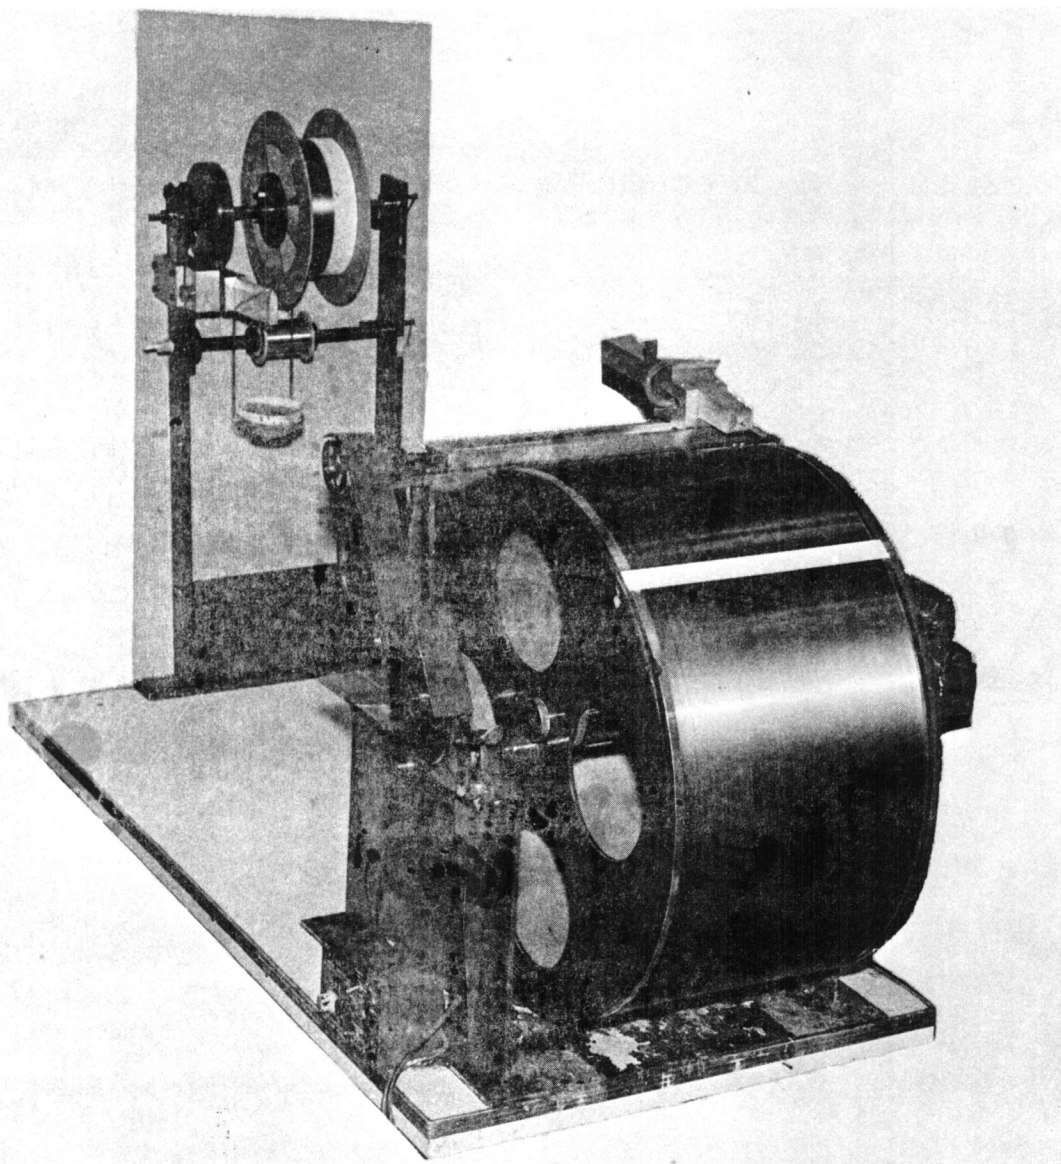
Drum Winding Equipment with a Completed Winding on the Drum.
